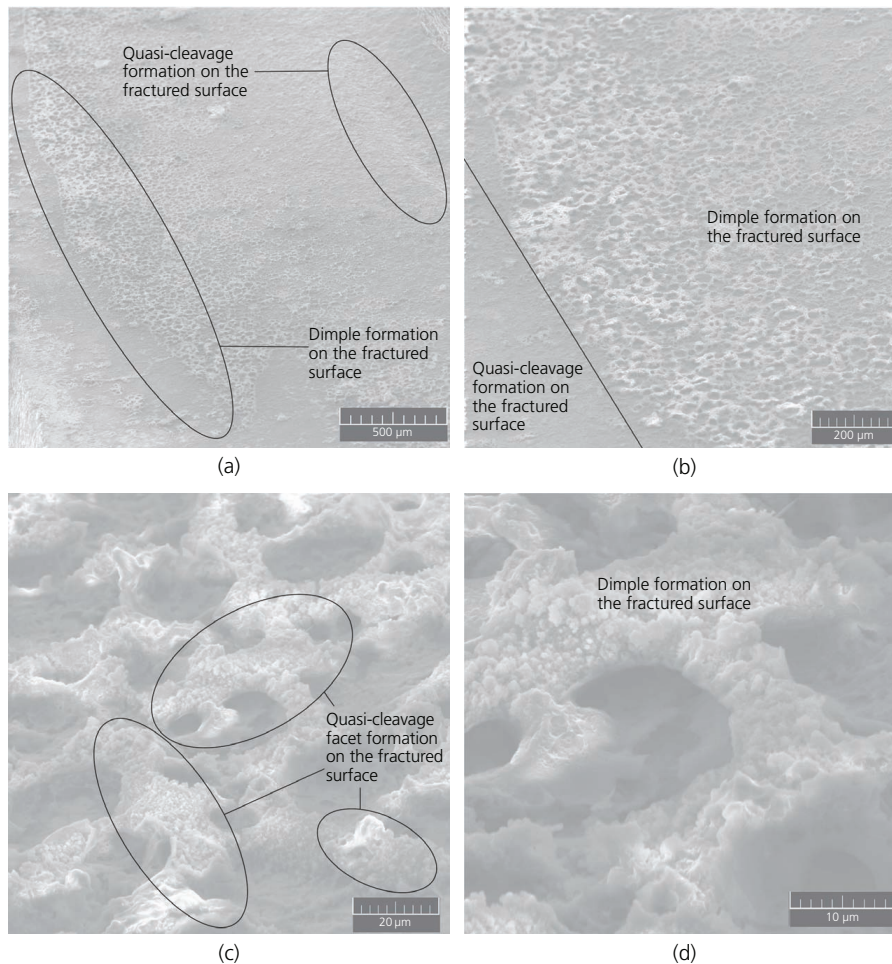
Fractography images of the lower side of sample 9: (a) formation of dimples and quasi-cleavages; (b) dimple formation representing ductile deformation; (c) enlarged view of quasi-cleavage facets representing brittle fracture; (d) enlarged view of partial dimple formation
